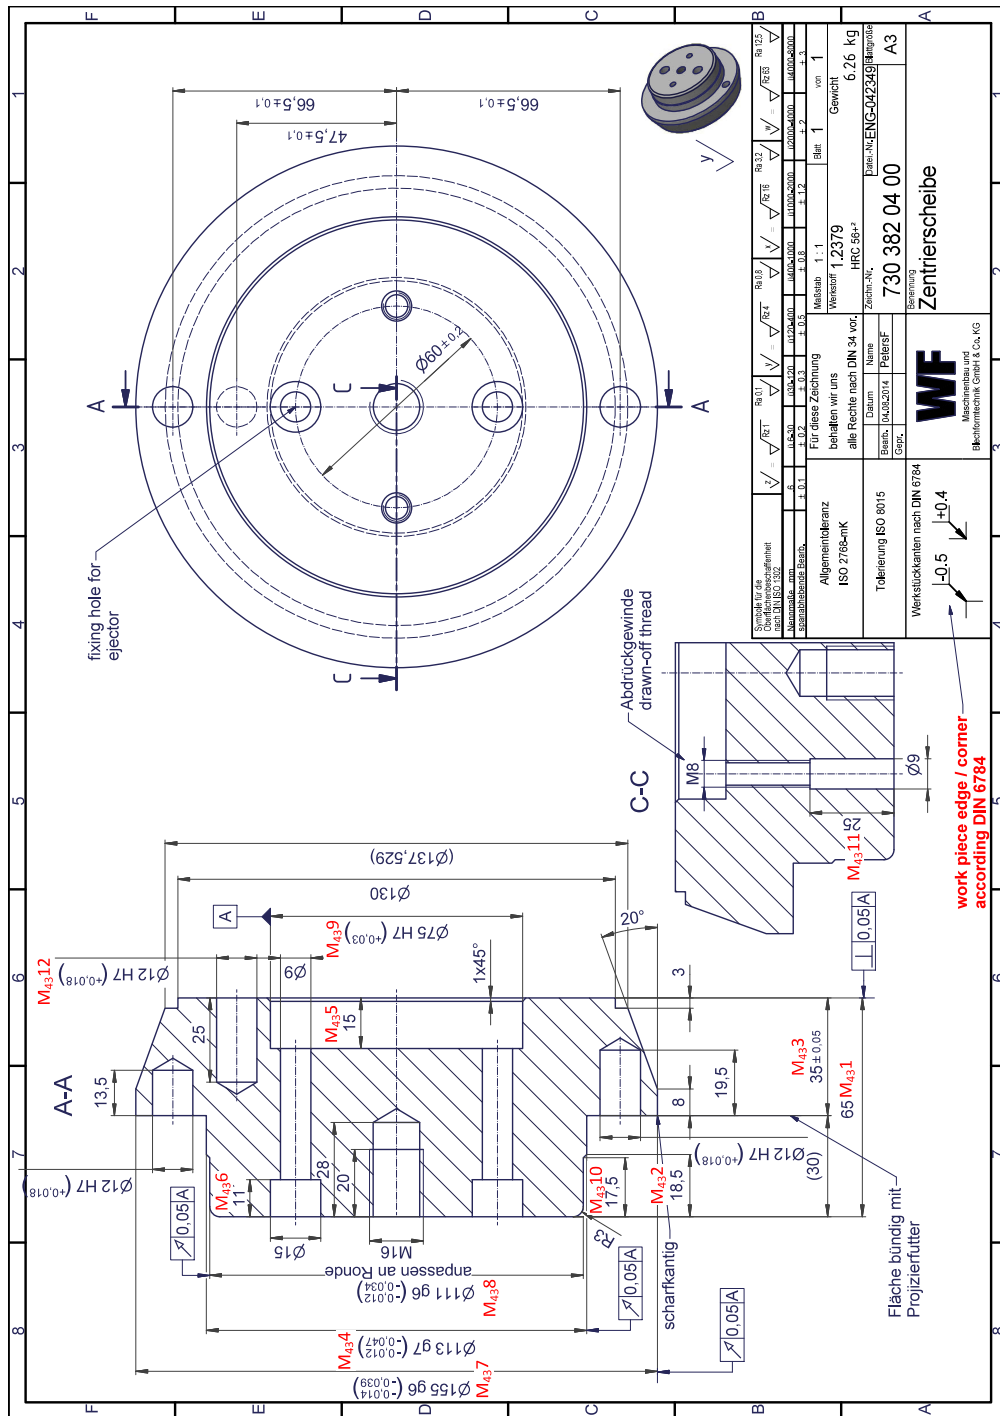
Drawing: Mandrel insert – 43°, for blanks up to 12 mm thick, ATI-SF – 730 382 04 00, “Zentrierscheibe”.
